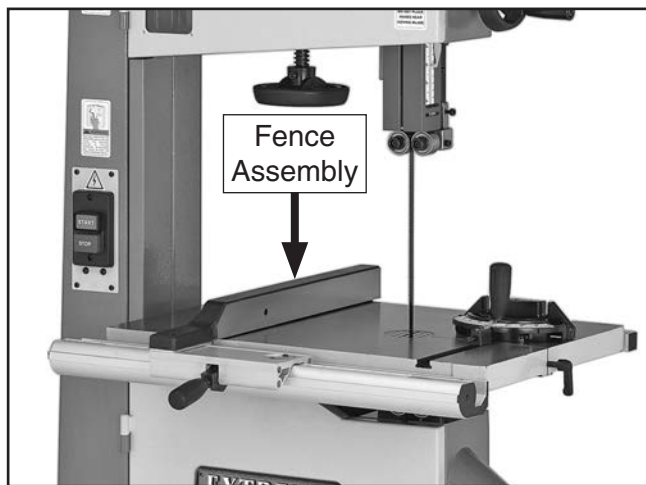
Fence assembly installed on G0513A40 and G0513X2.
